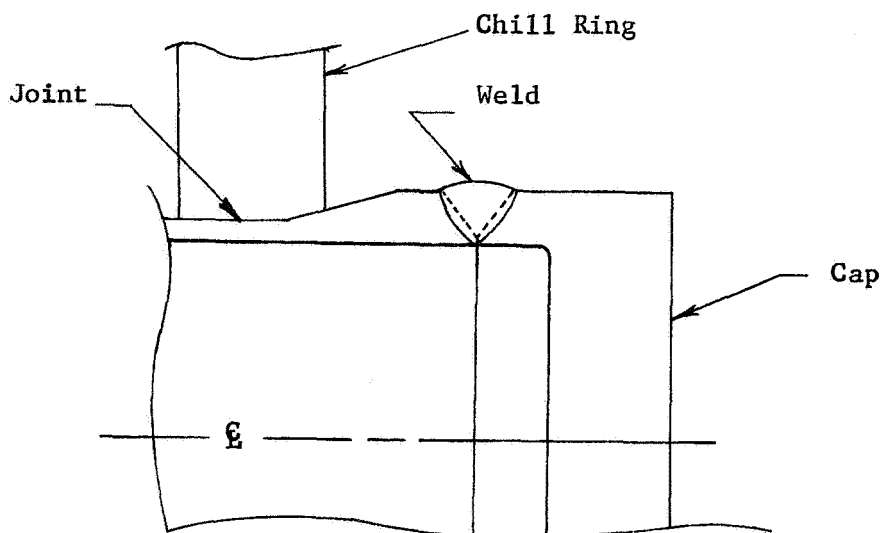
Concept for Aluminum End Fitting Weld Using Tubular Cap
